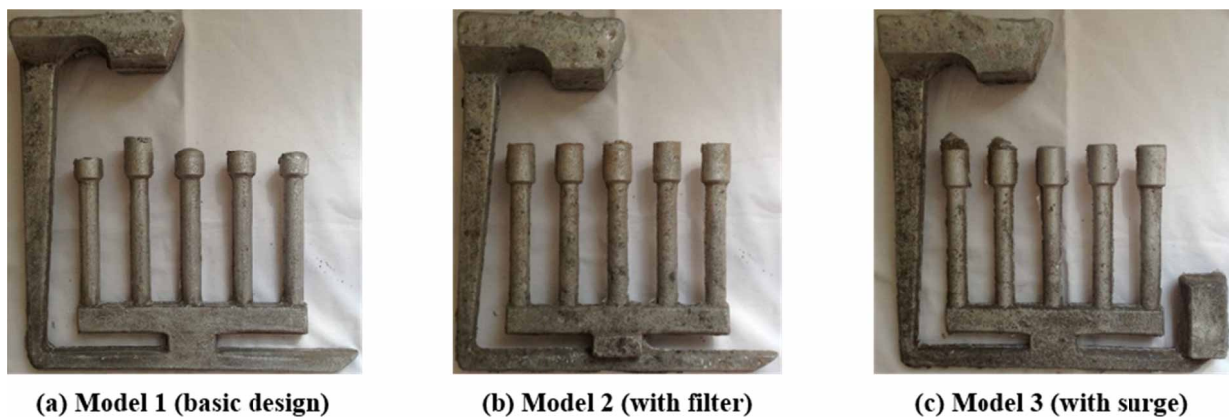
Presentation of gating system and casting samples after shake out, (a) model 1-basic design, (b) model 2-with filter and (c) model 3-with surge
